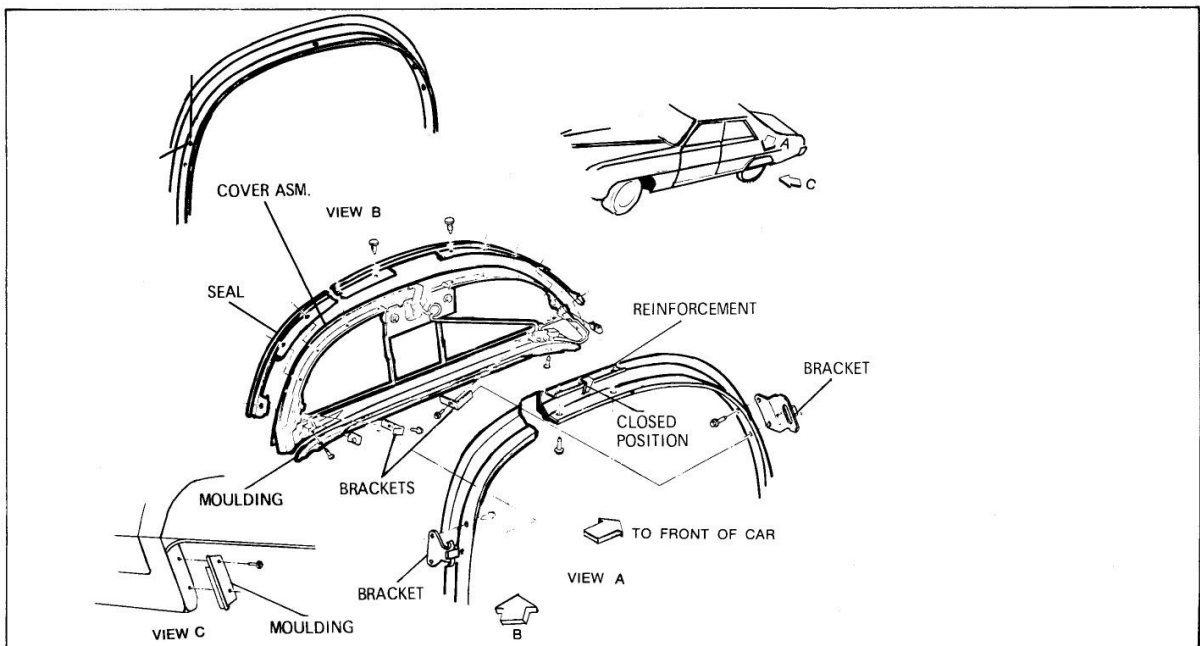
Pontiac Rear Wheel Opening Cover
